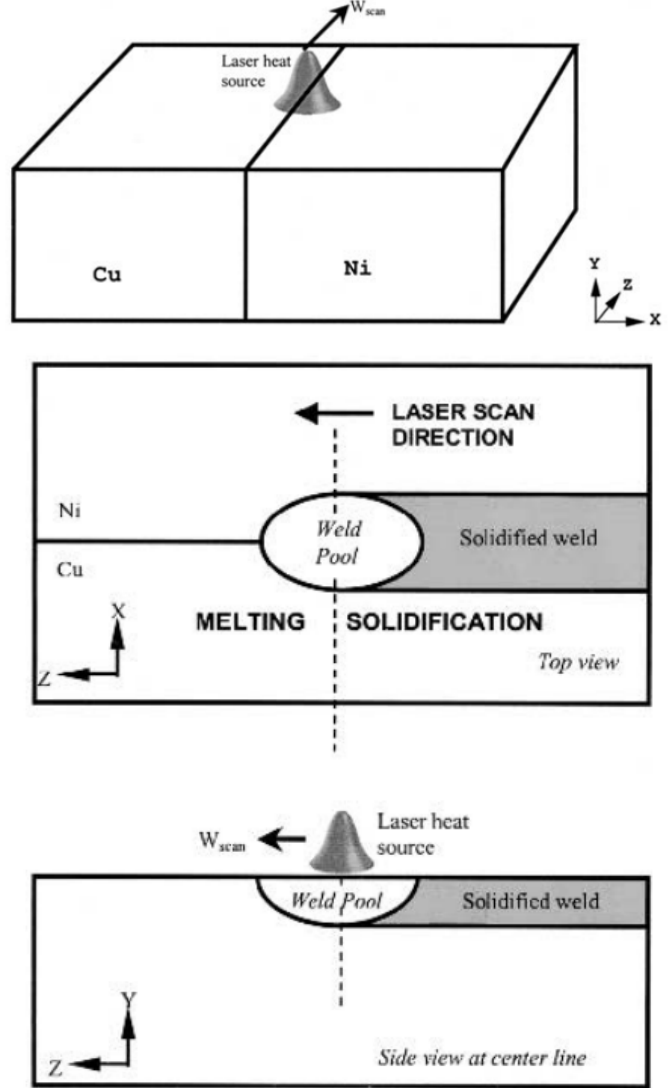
(a) Schematic of laser welding setup. (b) Schematic illustrating simultaneous melting and solidification during continuous welding.
